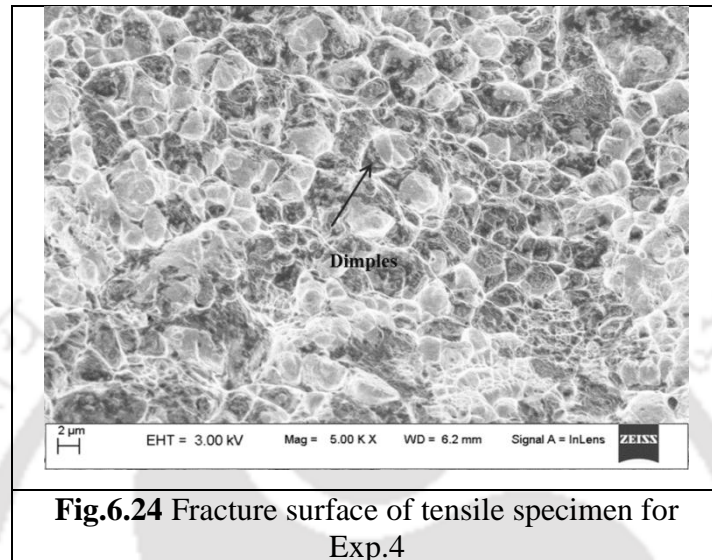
shows the fracture surface of the tensile sample for Exp.4 which have achieved lowest UTS. It is observed that the fracture is ductile in nature, with equiaxed dimples distributed non-homogenously over the fracture surface which indicates that material has sufficiently undergone plastic flow before failure. The fracture surface of the dimple rupture comprises peaks and valleys. The dimple rupture mode fracture is associated with nucleation of voids at the inclusions in the material, Lippold (2015). In general, deeper the dimples better is the ability of the material to undergo plasticity before failure.
